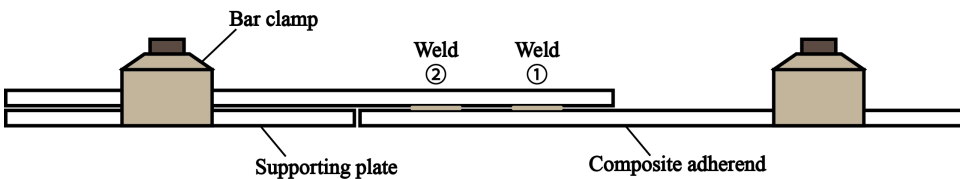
Schematic of the welding sequence used in the sequential double-spot welding in the second part of experimental work, denoted as Sequence II. Weld 1 and 2 represent the spot welded in the first and second place, respectively.
